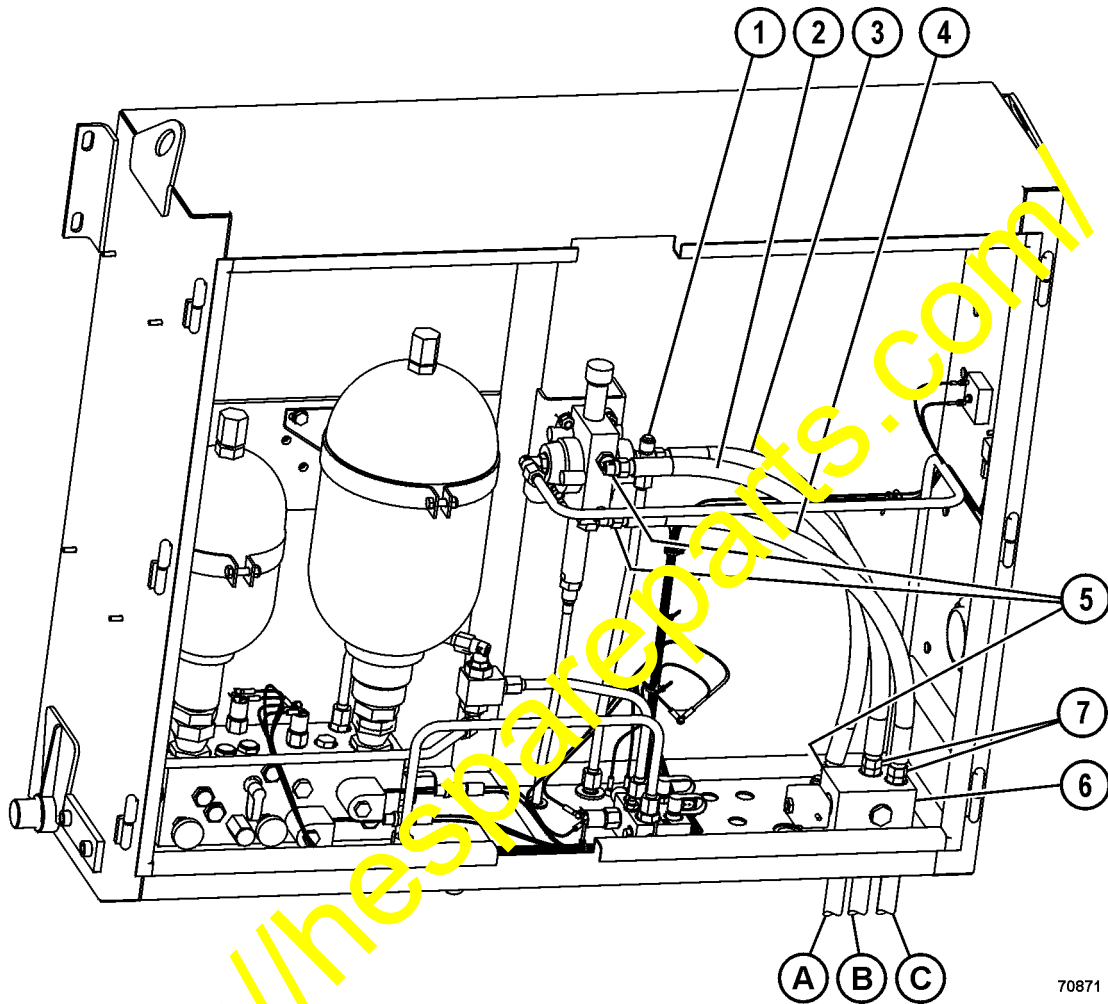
TYPICAL HYDRAULIC COMPONENTS CABINET WITH KIT (XK0141) INSTALLED
